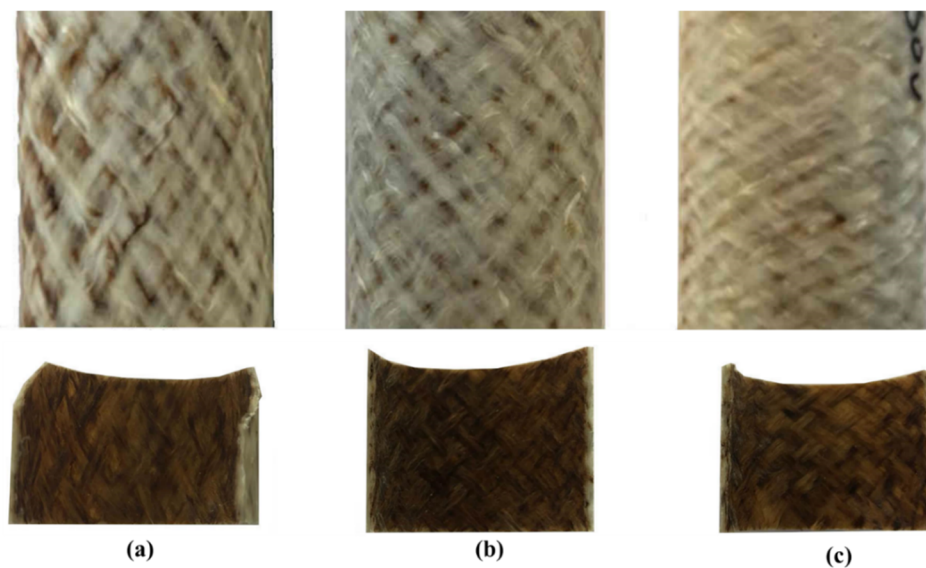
Outer and inner surfaces of (a) 30°, (b) 45° and (c) 60° braided beams produced using RVM.
